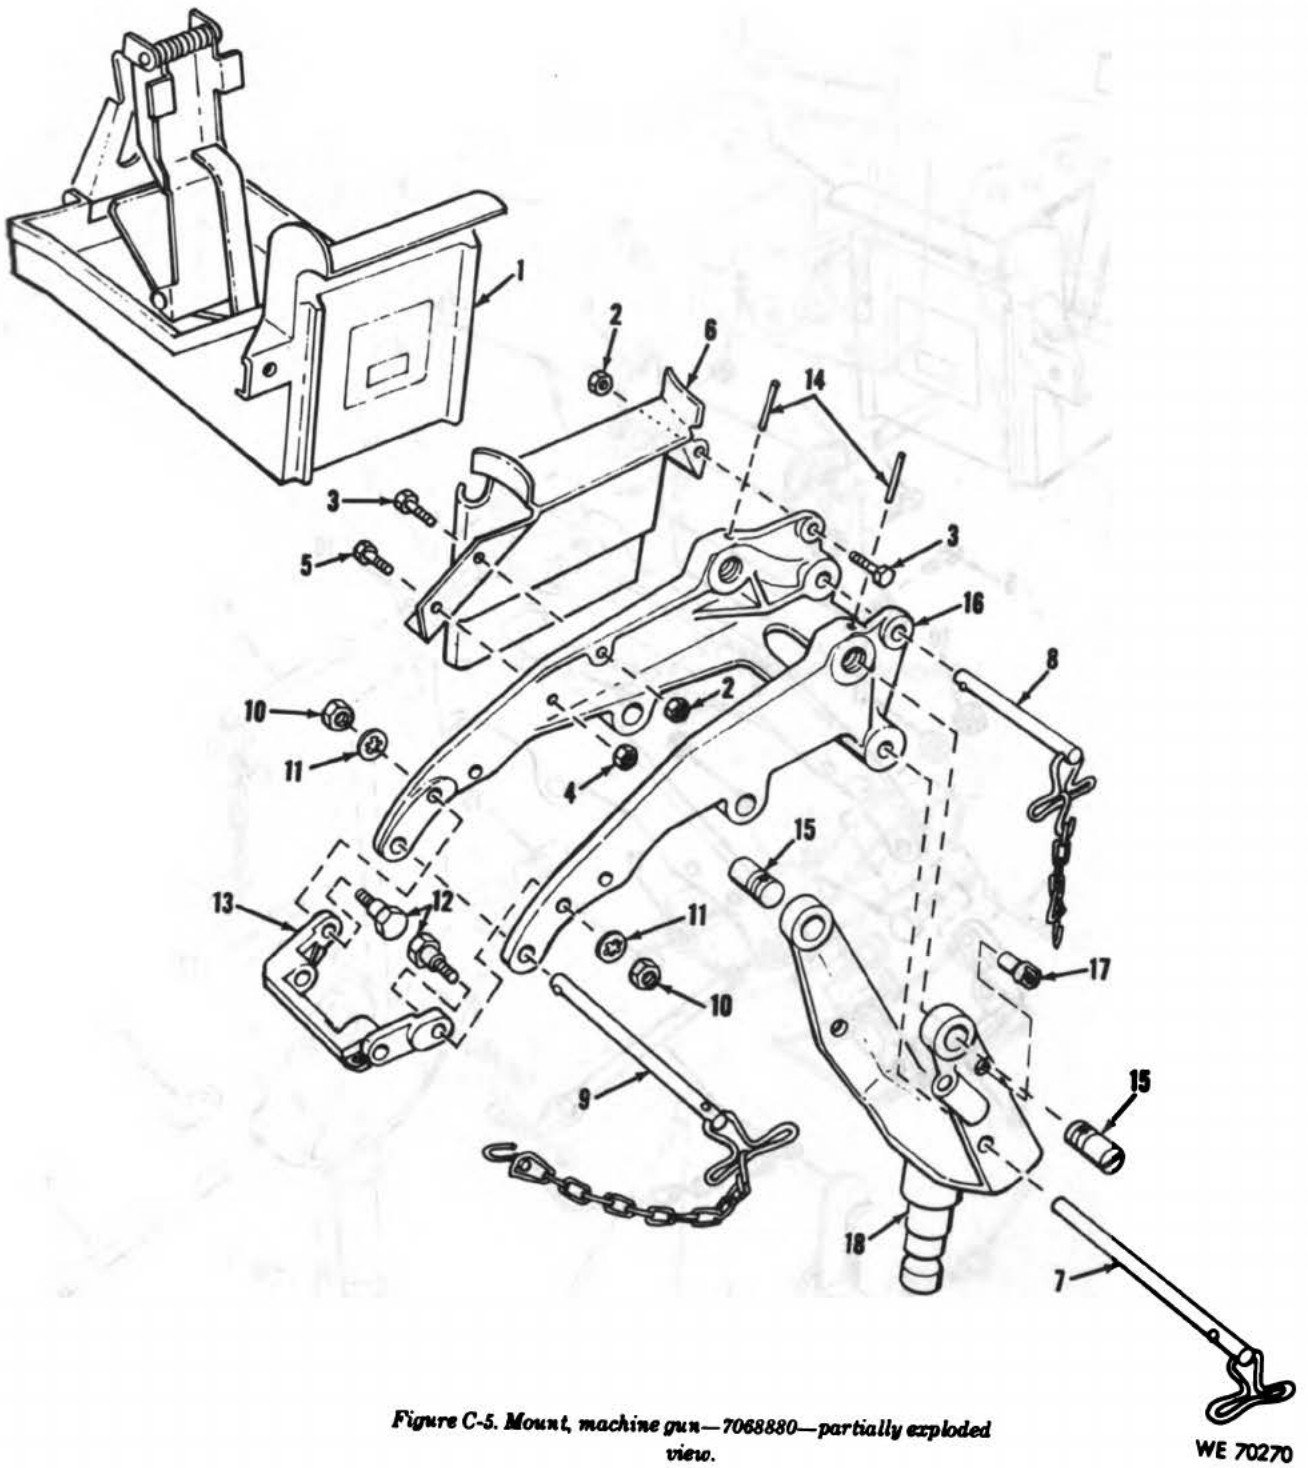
Mount, machine gun—7068880—partially exploded view.
